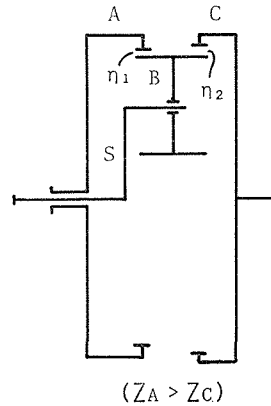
2K-H Type Mechanical Paradox Planetary Gear
